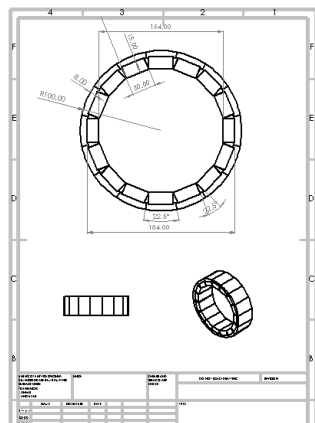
Technical cross section drawing for ring magnet on one side.
